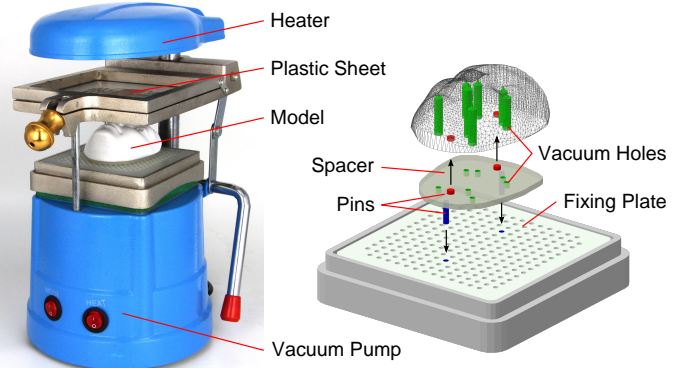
The setup of thermoforming. (left) The device we use with sheet and model fixed on the machine. (right) How the model is fixed to the model container.
